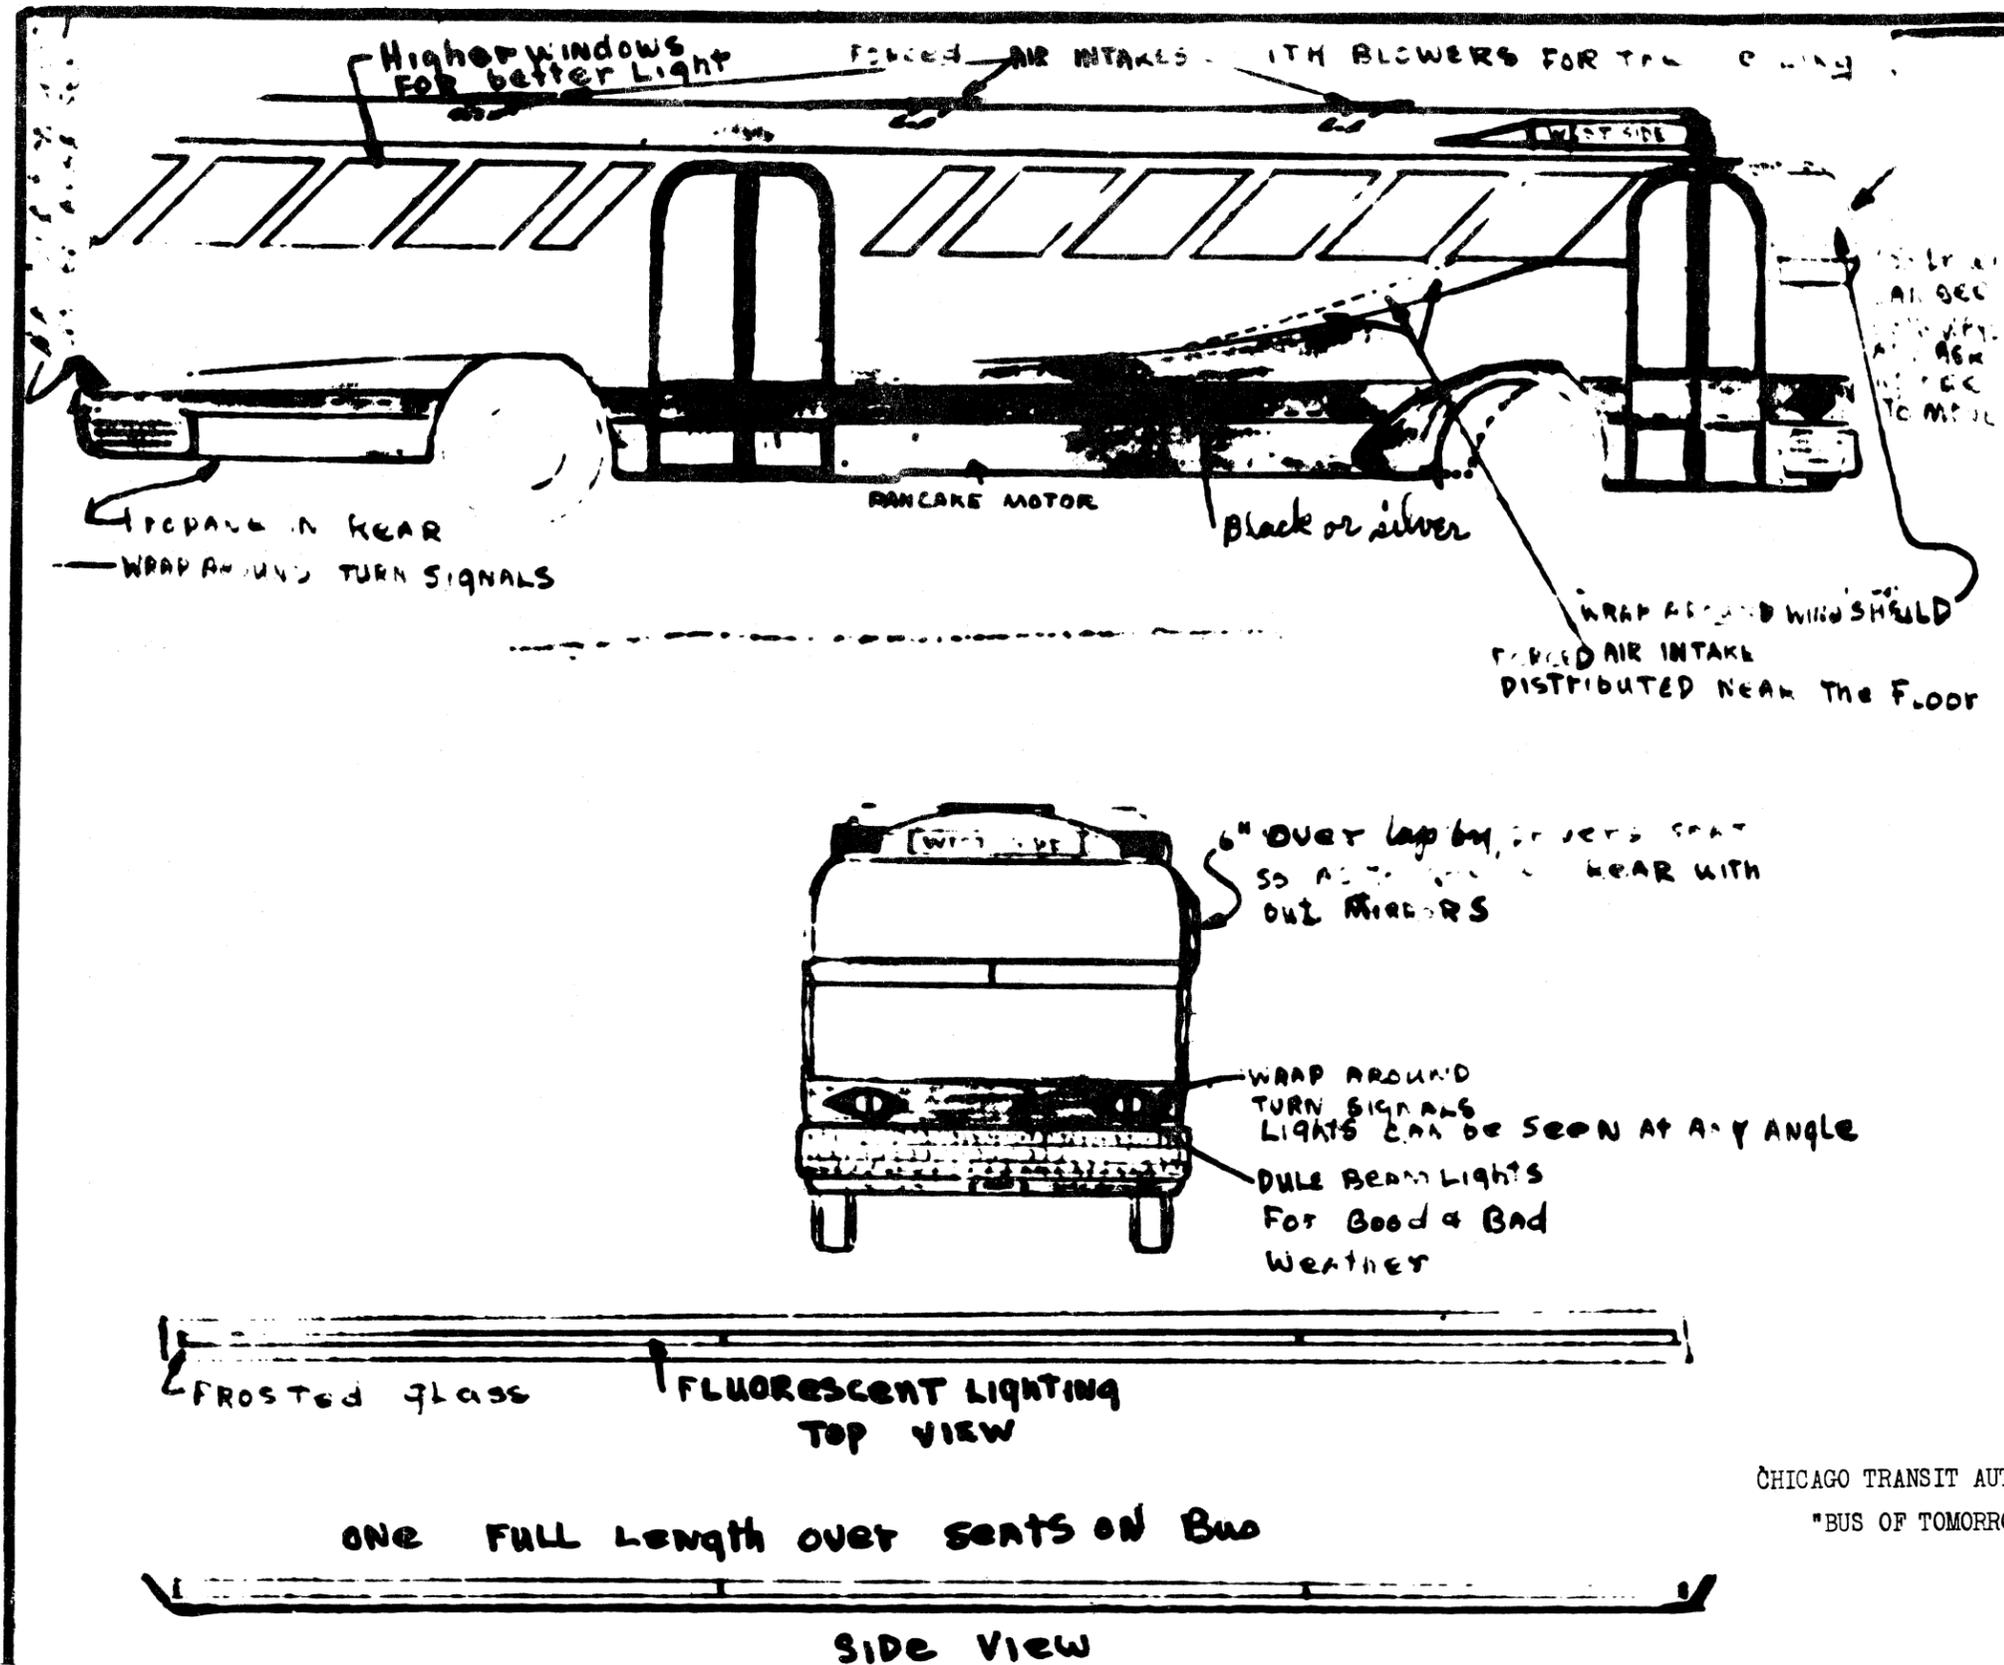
21 inclusive - "Proposed Design of City Coach," detailed drawings.
